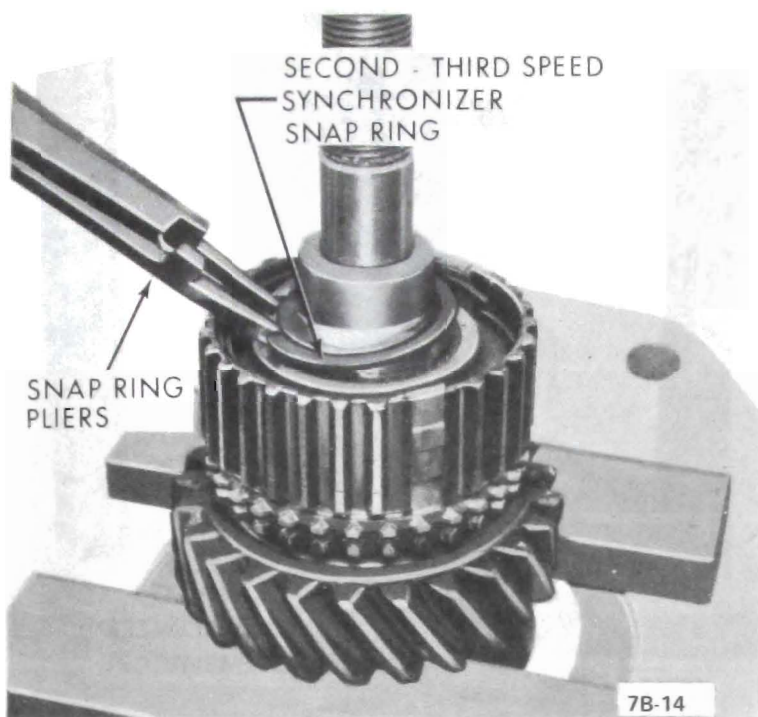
B-14 - Removing Second-Third Speed Synchronizer Snap Ring
